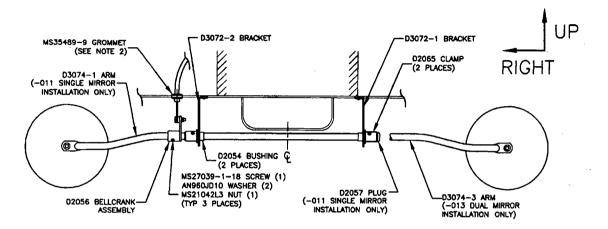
View A: Looking Aft (D119-696-011/-013 Mirror Shown)
